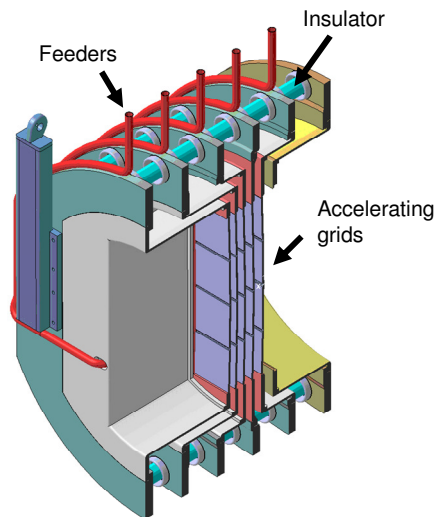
CAD view of the MAMuG accelerator for the ITER HNB, cross section
